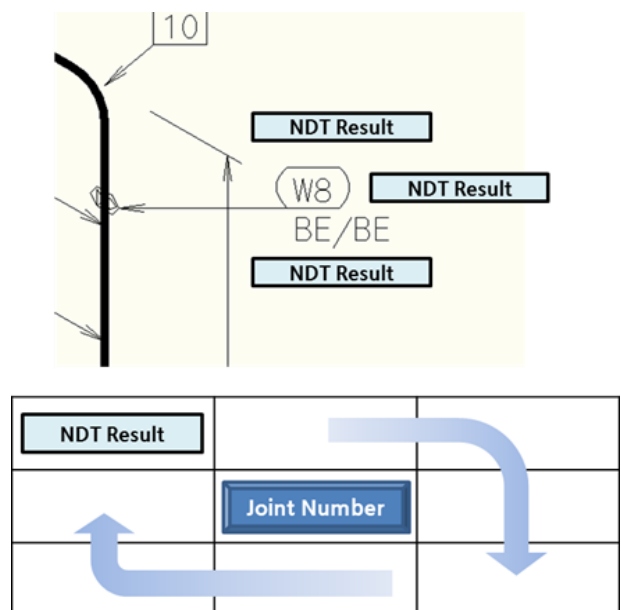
Patten allocation of welding Non-Destructive test information
